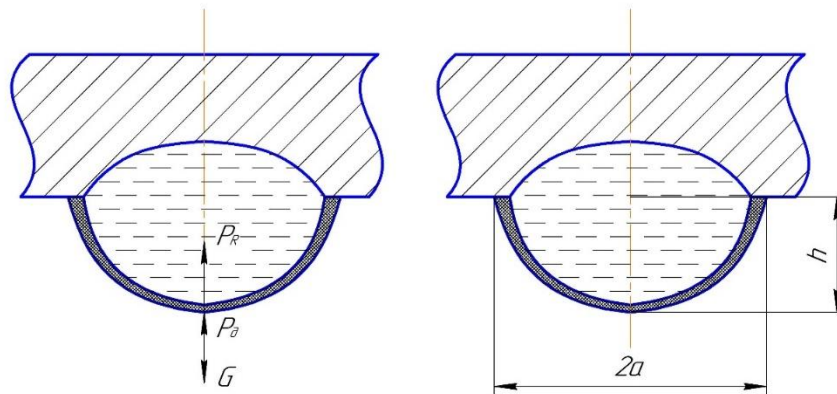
The effect of forces on a symmetrical welding pool when welding in the ceiling position
